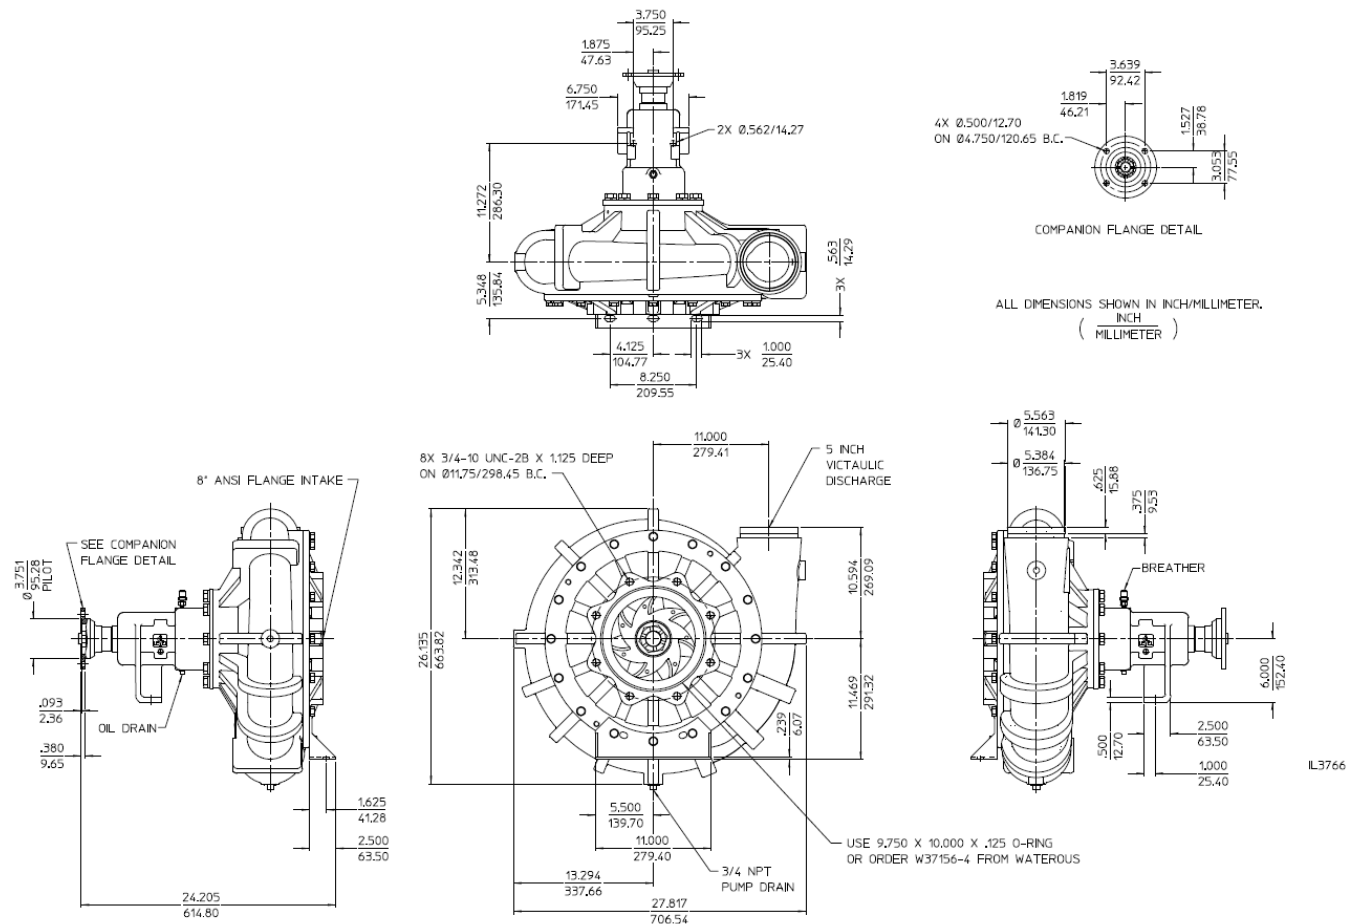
shows the mounting areas on the CRU pump. There are mounting holes on the bearing housing as well as the pump body under the intake adapter.
